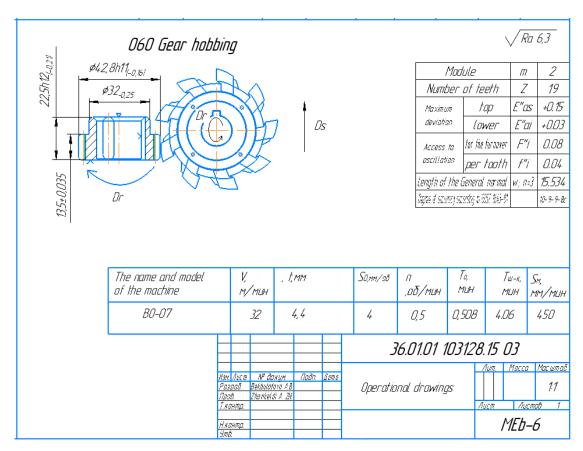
Operational drawing of gear hobbing in Kompas 3D
